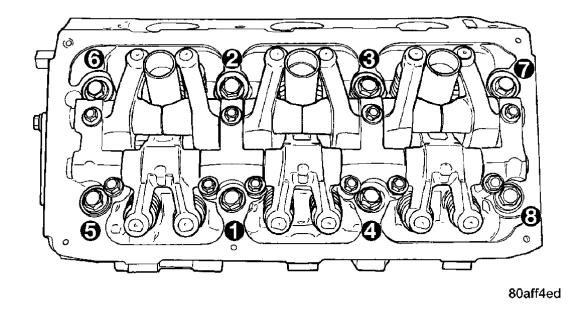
Cylinder Head Bolt Tightening Sequence Courtesy of CHRYSLER LLC
